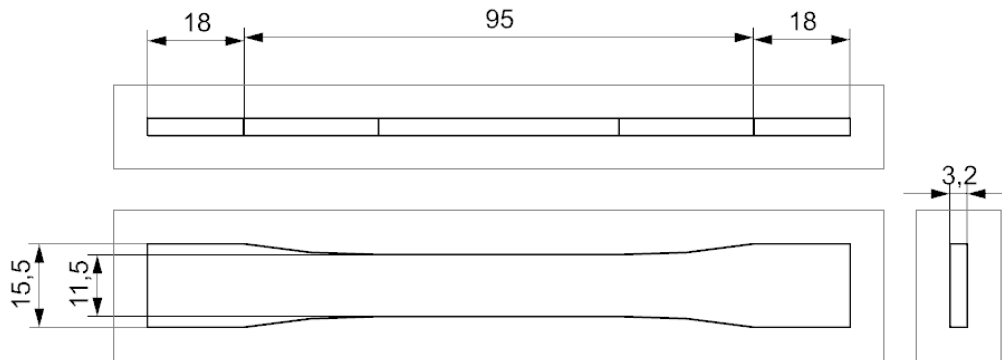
Technical drawing of dogbone specimen, measurements are in [mm].
